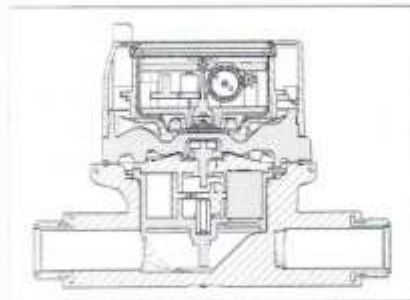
Sectional view of V200 meter with thermoplastic housing and brass threaded connection inserts
